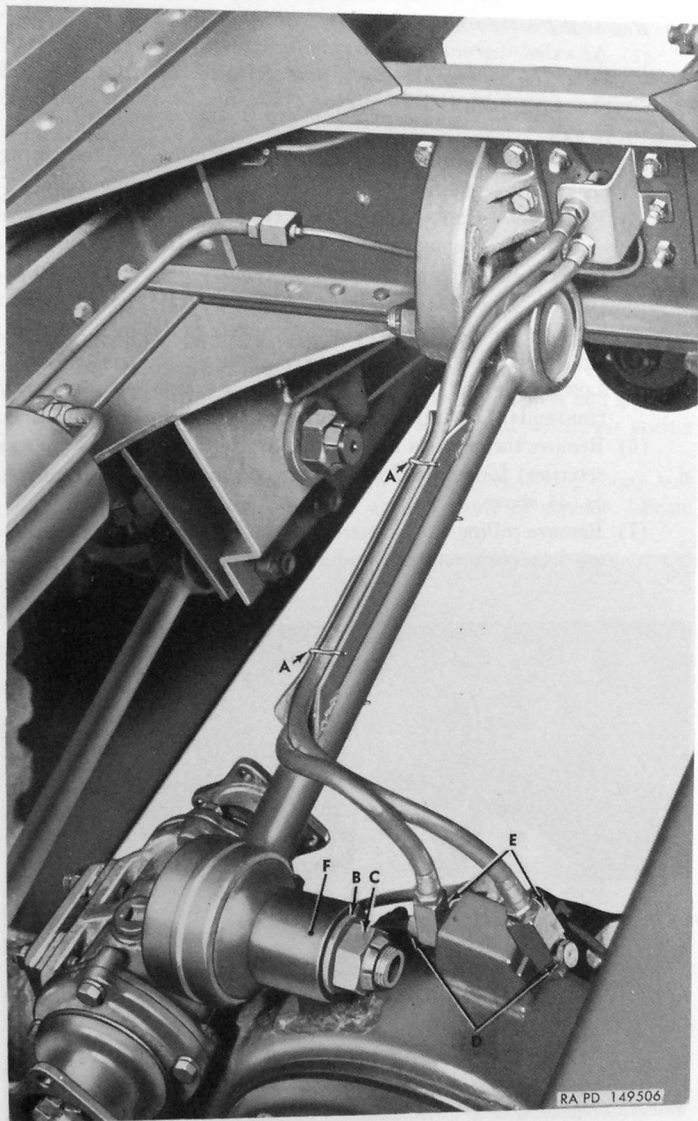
Forward rear axle upper torque rod and lines disconnect points.
